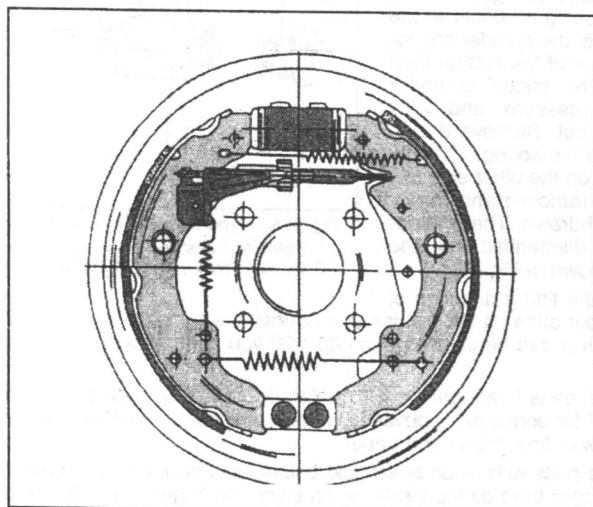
Before fitting the brake drums compare the fitted brake shoes with the illustration to make sure all parts are fitted as shown. This mainly concerns the return springs.
